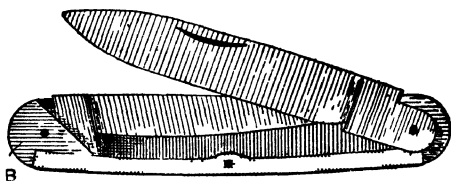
Pen-knife with Brass Plate for Separating Blades.
